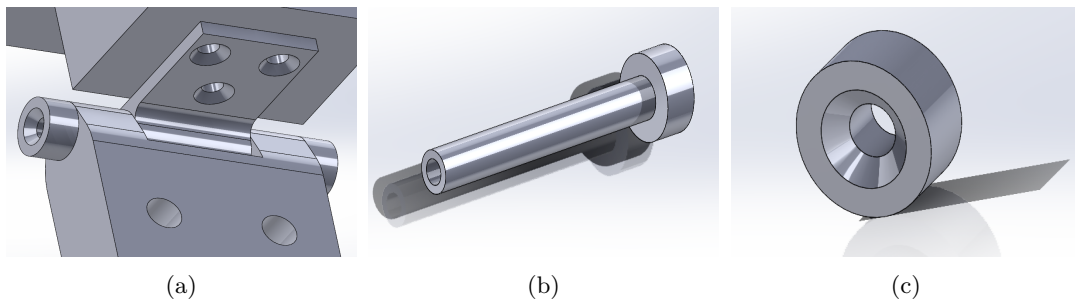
Finished motor and upper arm model joint. (a) Hinge joint representation. (b) Hinge screw. (c) Hinge screw counterpart.
